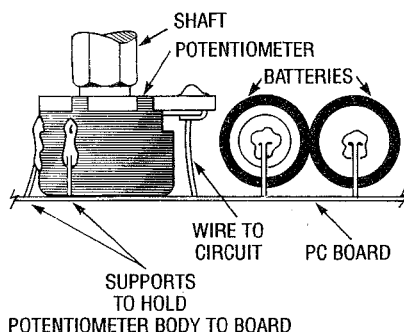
YOU MUST USE PIECES of bus wire to attach potentiometers R4 and R6 securely to the PC board.
